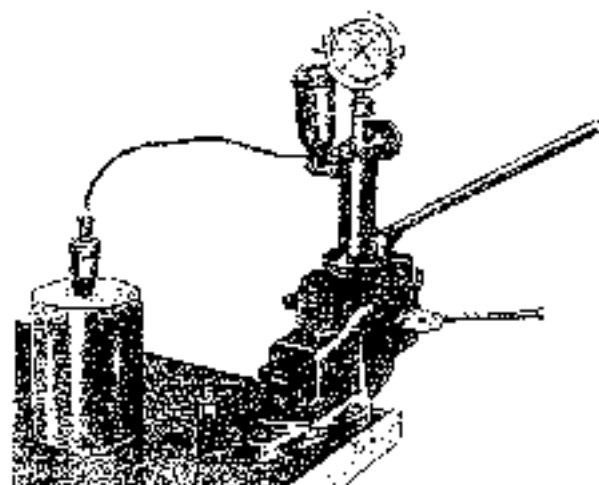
Testing apparatus for safety and pressure relief valves, using valve holder A 197032/A/B.
